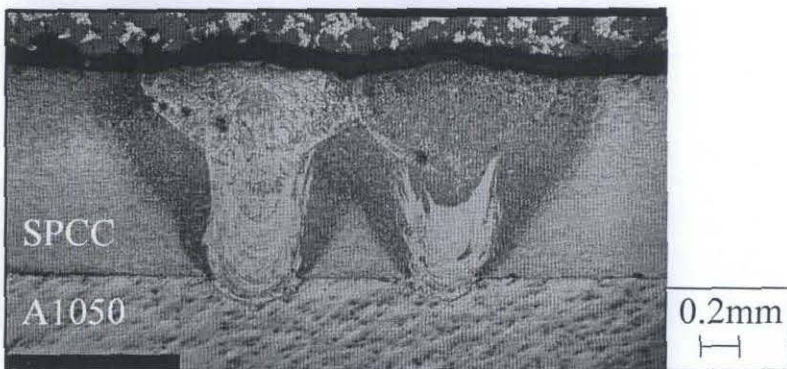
Macrostructures of the welds of SPCC/A1050.
